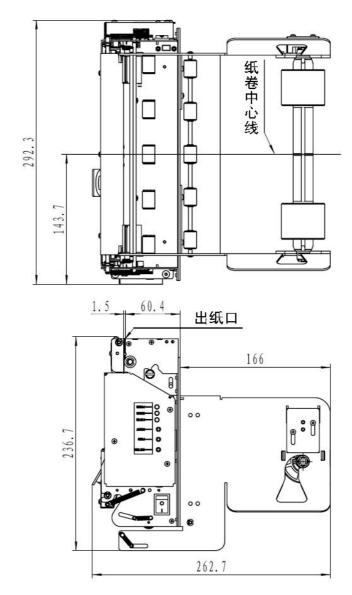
Structural Dimension Drawing of the Vertical Paper Stand (237 * 294 * 263mm) - 1 -14
